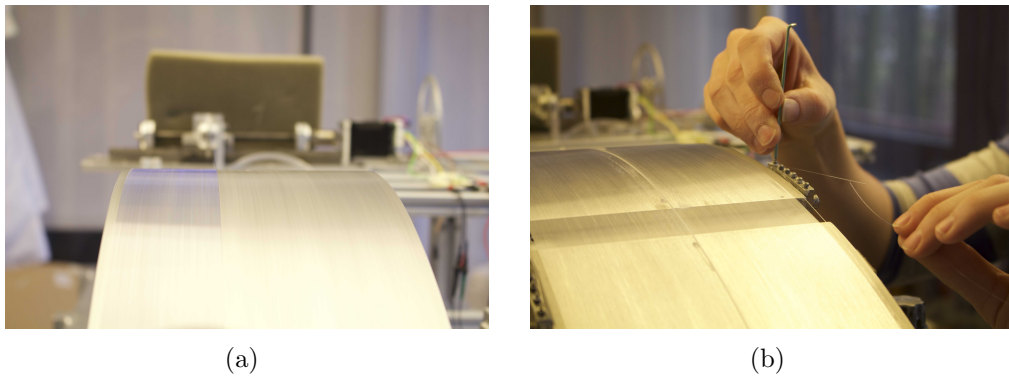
(a) winding a fibre layer (b) fixing the fibre end with a screw on the wheel
